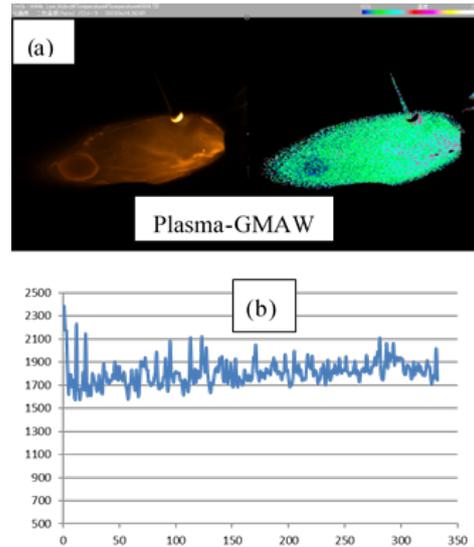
The weld pool of Plasma-GMAW hybrid welding imaged by thermal camera. (a) Weld pool surface; (b) Temperature distribution on the weld pool surface.
